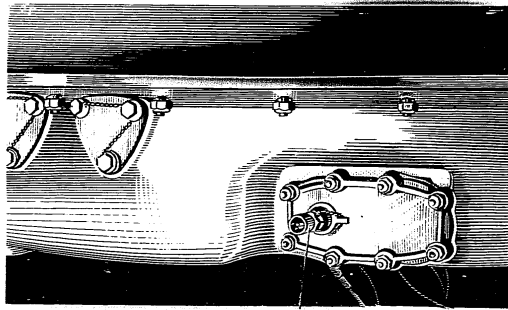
MOUNTING 11-1 TRANSMITTER ON MAIN GEAR BOX HOUSING
